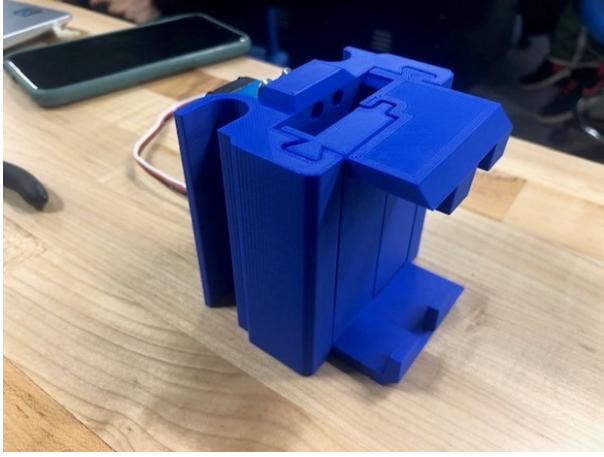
Final claw design. Its compact rack and pinion design gave the claw arms much more support than a rotating-arm method.
